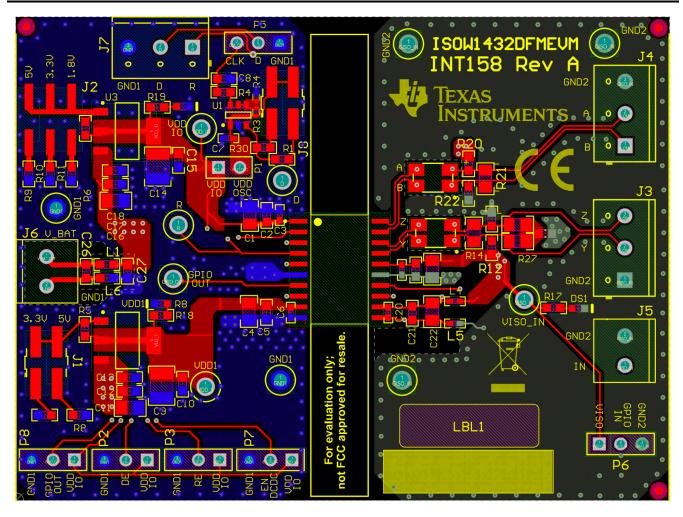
ISOW1432DFMEVM PCB Layout - Top Layer
